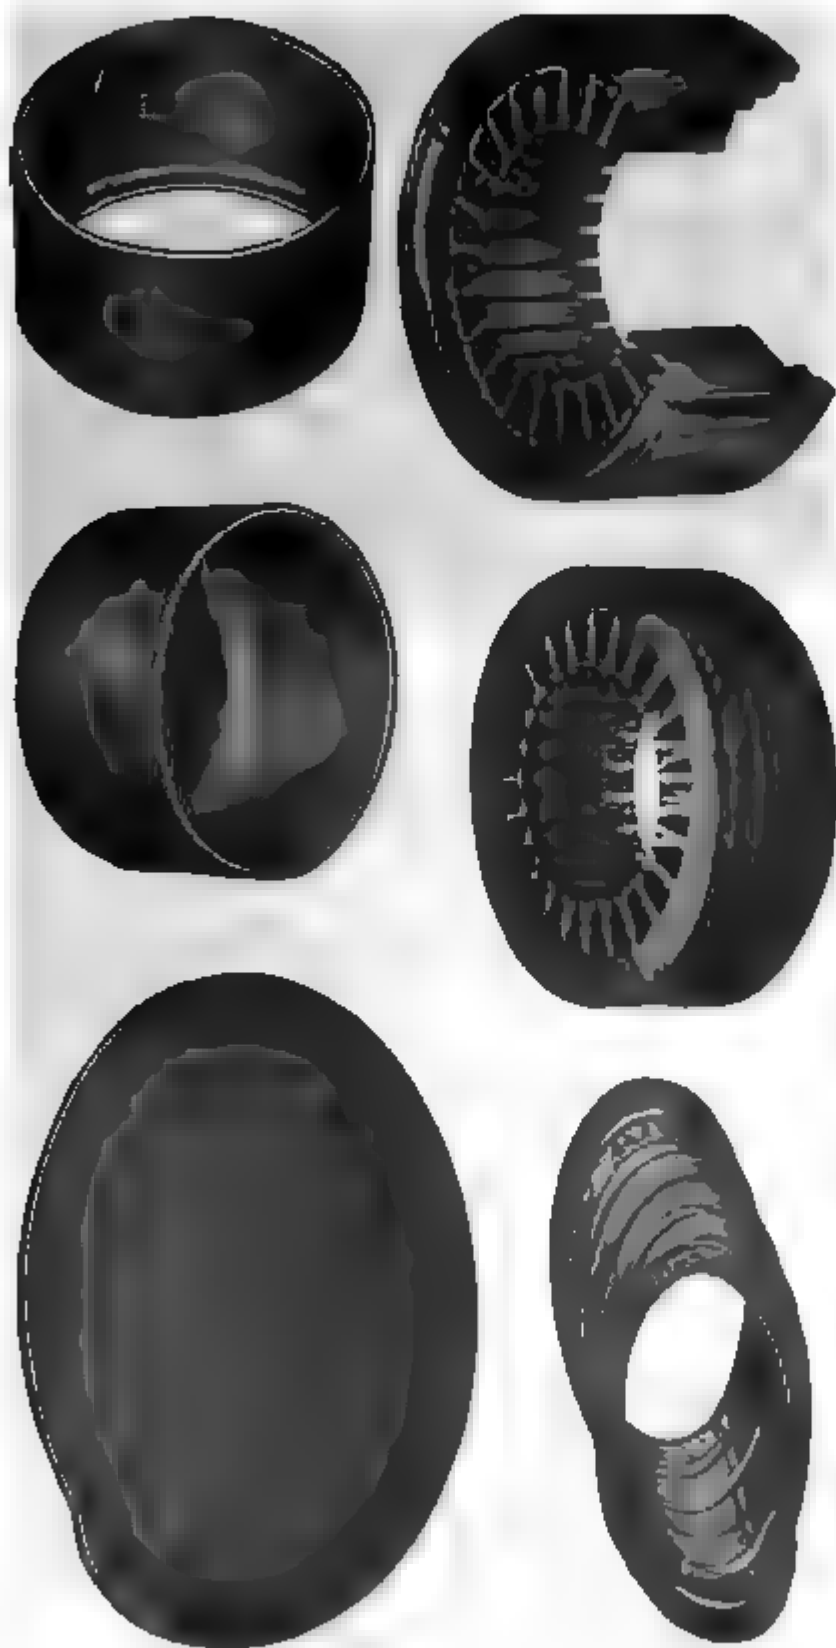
and 1643. -Western Electric end flange rivets and punchings of riveted frame induction motor. The riveted frame is constructed of two cast iron flanges between which the stator laminations of sheet steel are securely clamped and riveted under hydraulic pressure. This construction exposes the laminations directly to the air and improves the radiation, thus insuring high overload capacity and low operating temperatures. The field slots are overhung or partially closed, affording mechanical protection to the coils.
